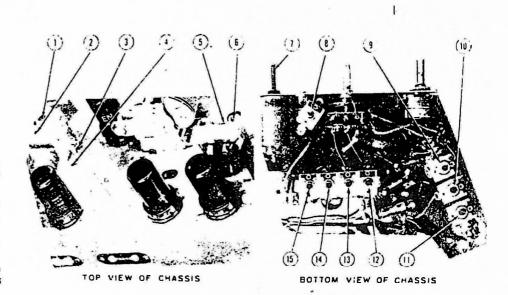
Top and bottom views of the receiver locating slugs, padders and trimmers for alignment purposes.
